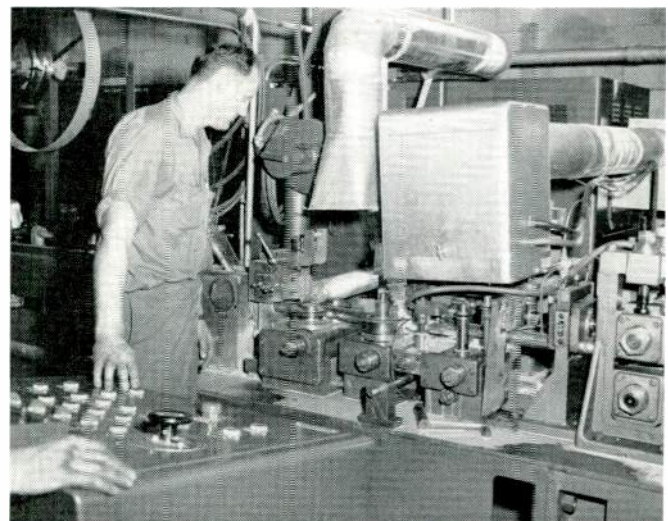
Closeup of Thermatool equipment welding galvanized steel.
